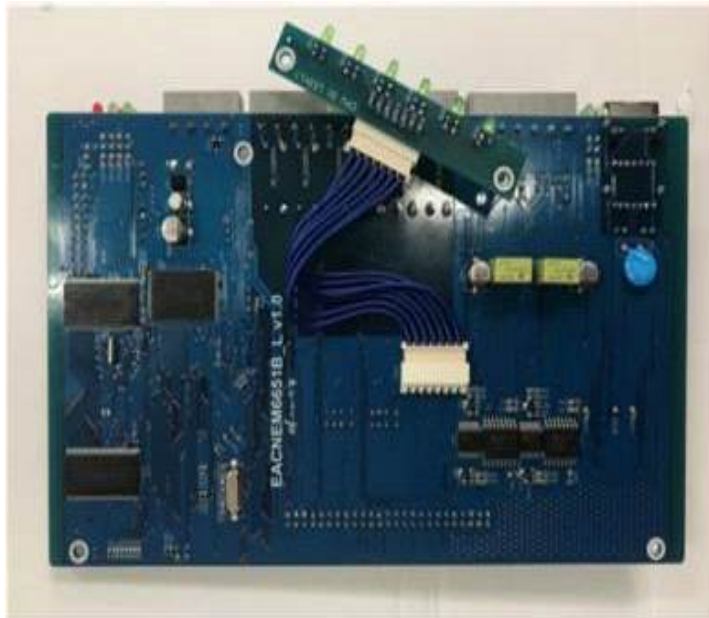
PCB photo on the right side of the SYSTEM(a)
